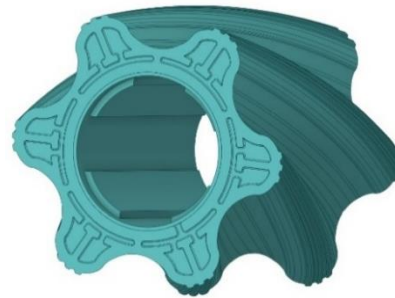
Optimized 3D model of the external mesh helical gear pump gear.
